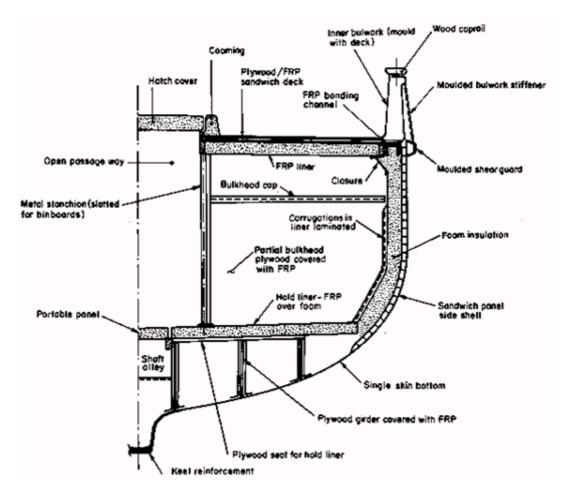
cross-section of a composite sandwich boat (from www.fao.org).
